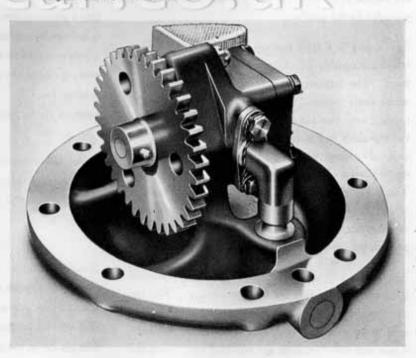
VIEW OF OIL PUMP AND BASE PLATE
